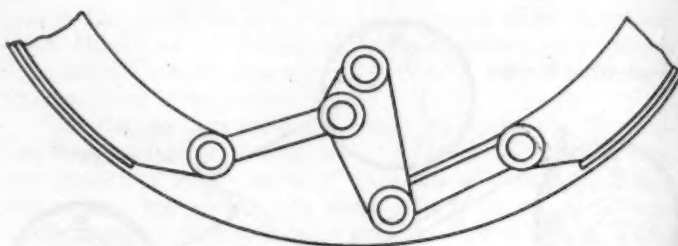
BRAKE DESIGNED FOR HEAVY DUTY
